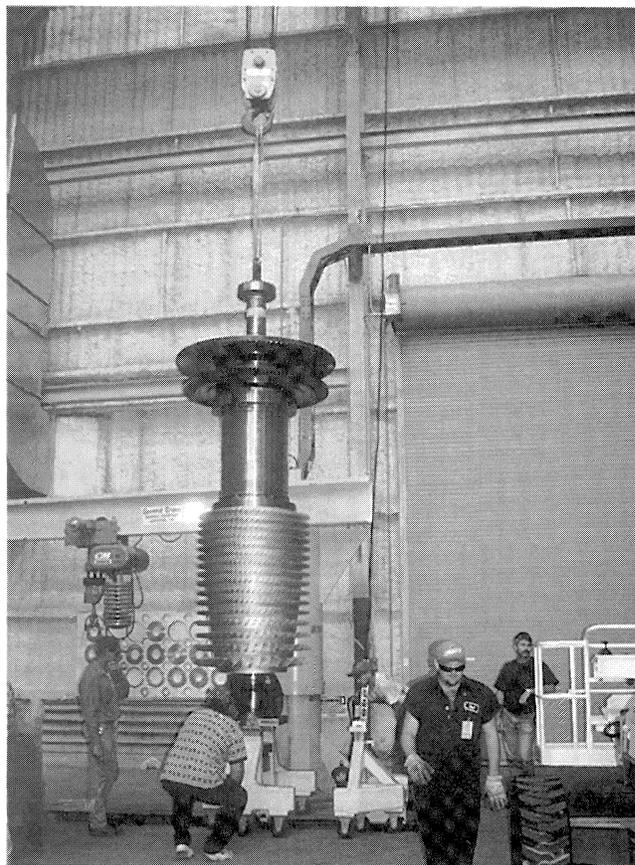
Gas Turbine Rotor Rotated to the Vertical Position and Ready to Be Removed from the Pivot Block Assembly.
